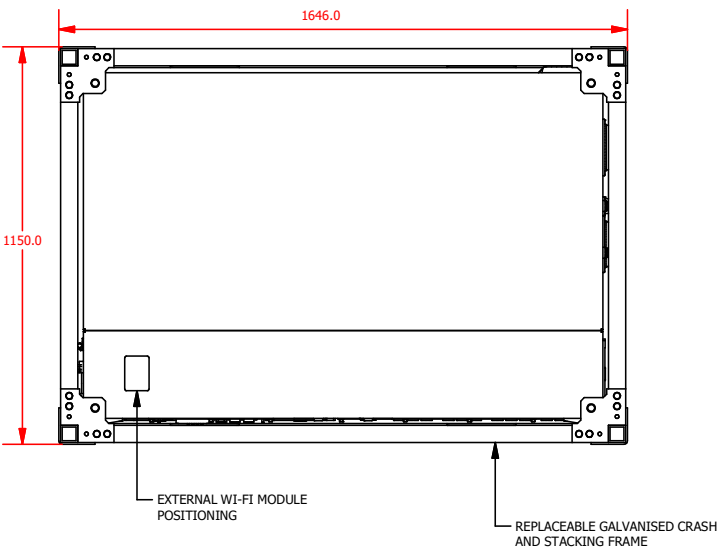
LC35 Load Bank General Arrangement - Plan View
